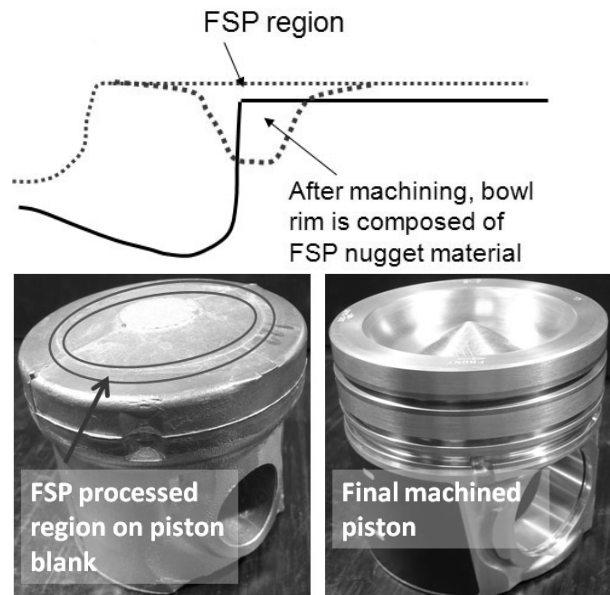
Cast piston blank. (The area in the bowl rim after machining will be FSP for improved microstructure.)
